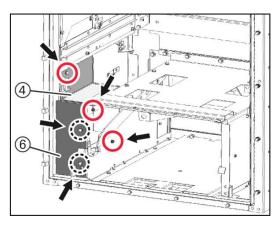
5 bolted joints on wiring duct cover, panel width 1000 mm
